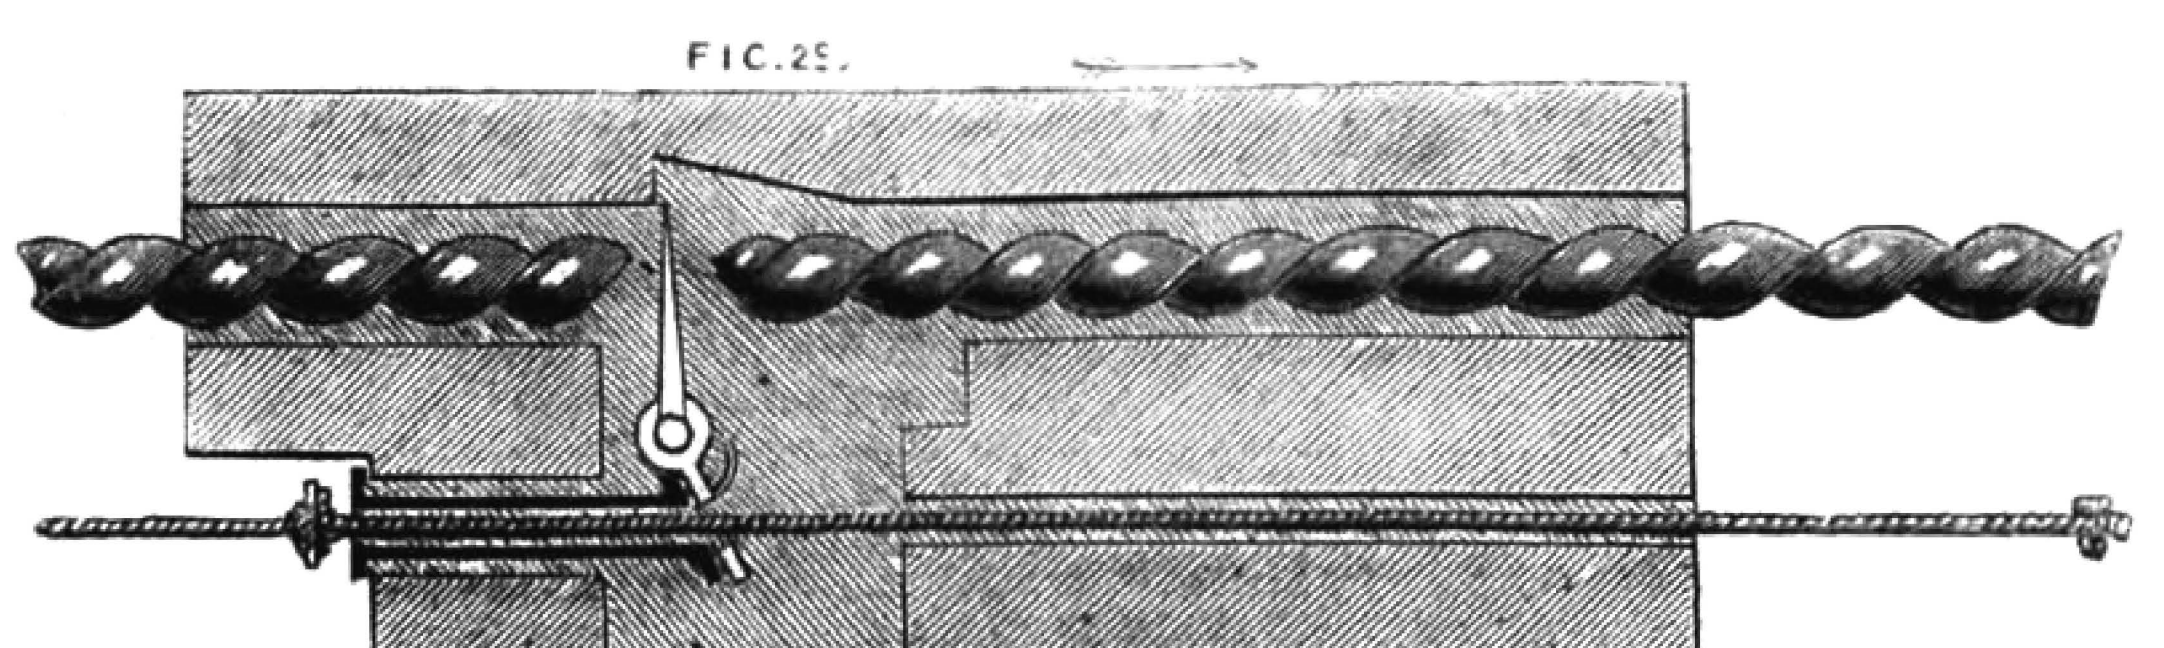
IMPROVED CUTTER, HAVING SEVERED THE HAWSER.
